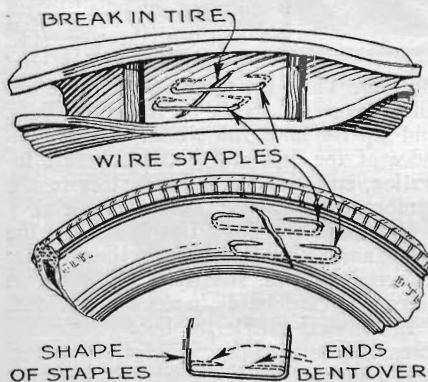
Holes cut by bottles in good tires can be mended by stapling the cut edges together
